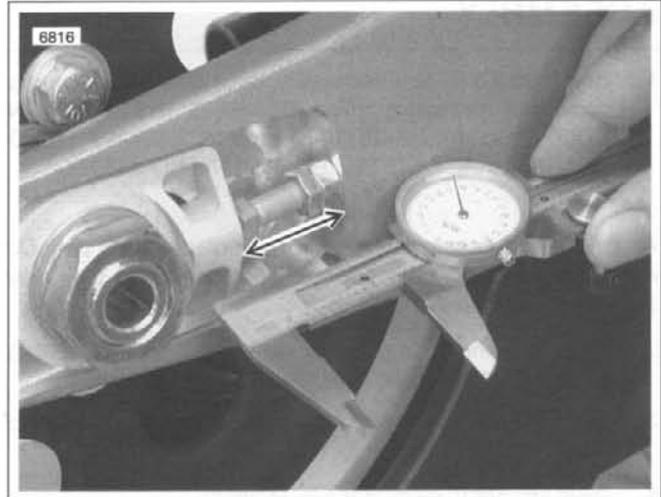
Checking Rear Wheel Alignment, Right Side Shown
